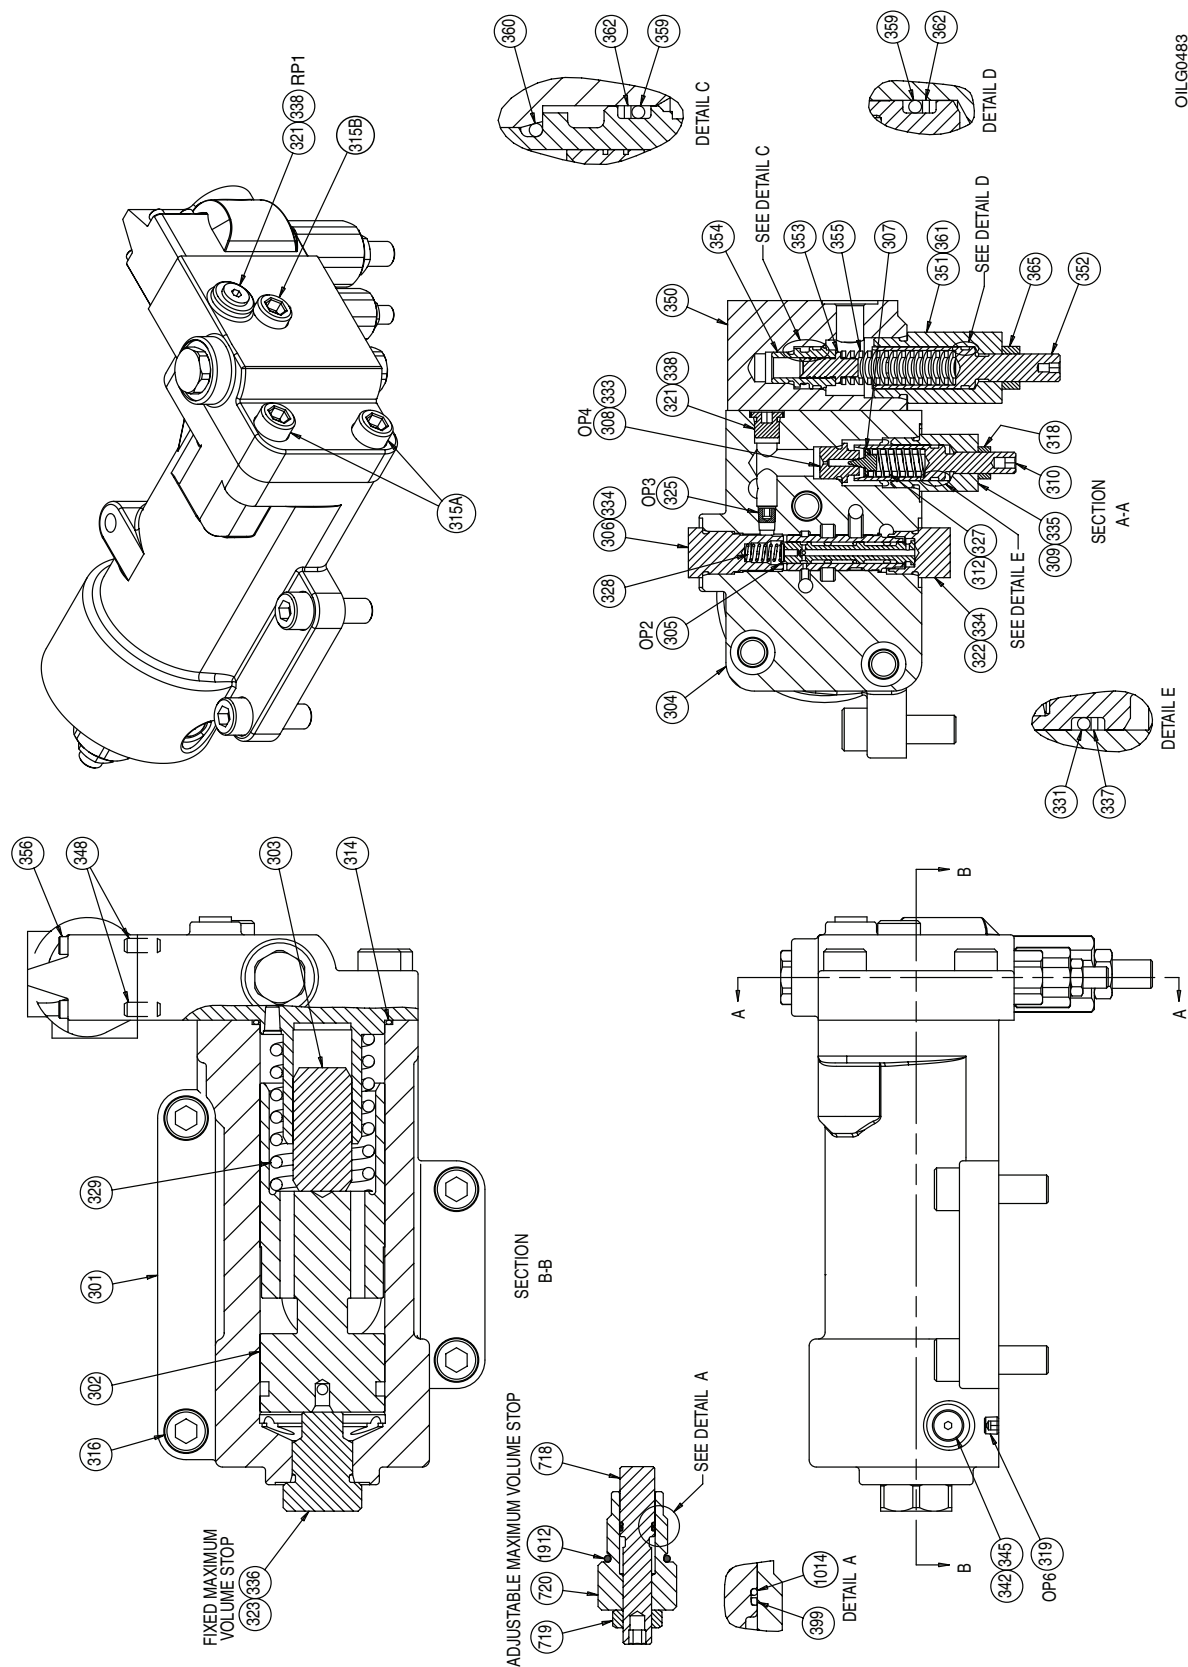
Cross Section Parts Drawing for PVG-150 “P-1NN/F” Single Pressure Compensator Control (520167-102 sheet 2)
